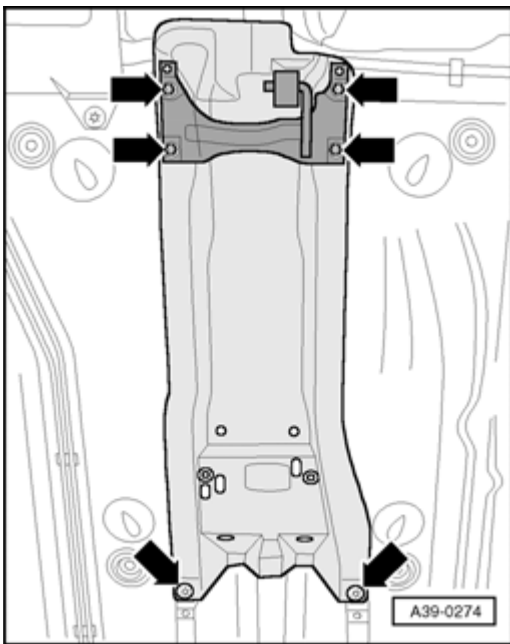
Unbolting Center Heat Shield At Both Front Securing Points
